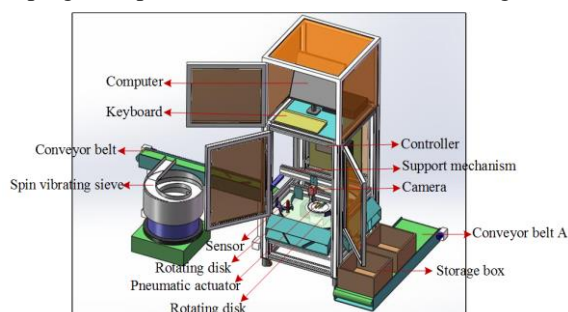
Contour defects visual detection system for irregular metal stamping workpiece.
